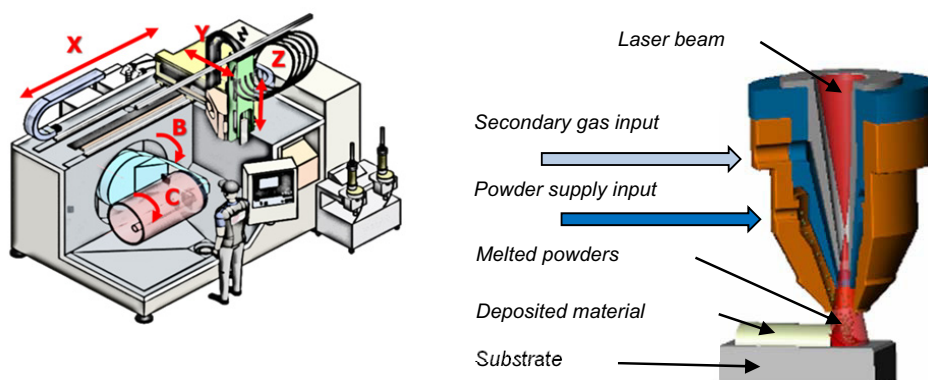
(a) the 5 axis CNC workstation; (b) the coaxial laser cladding nozzle patented by IREPA LASER.
